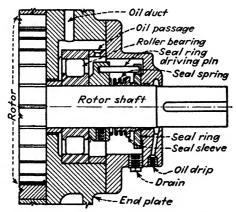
Shaft-seal assembly. (Courtesy of Yeomans Brothers Co.)
